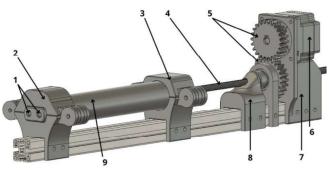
Material stack (1 - material outlet; 2, 3 - container holders; 4 - trapezoidal screw; 5 - motor gears; 6 - stepper motor; 7 - stepper motor holder; 8 - axial house; 9 - clay tank)
